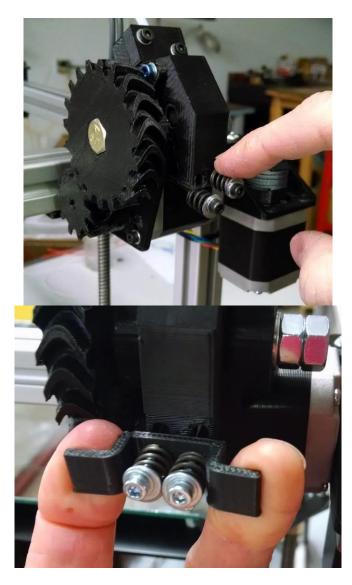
Disengaging the Idler Bar Springs (top-original extruder, lower -current extruder)
